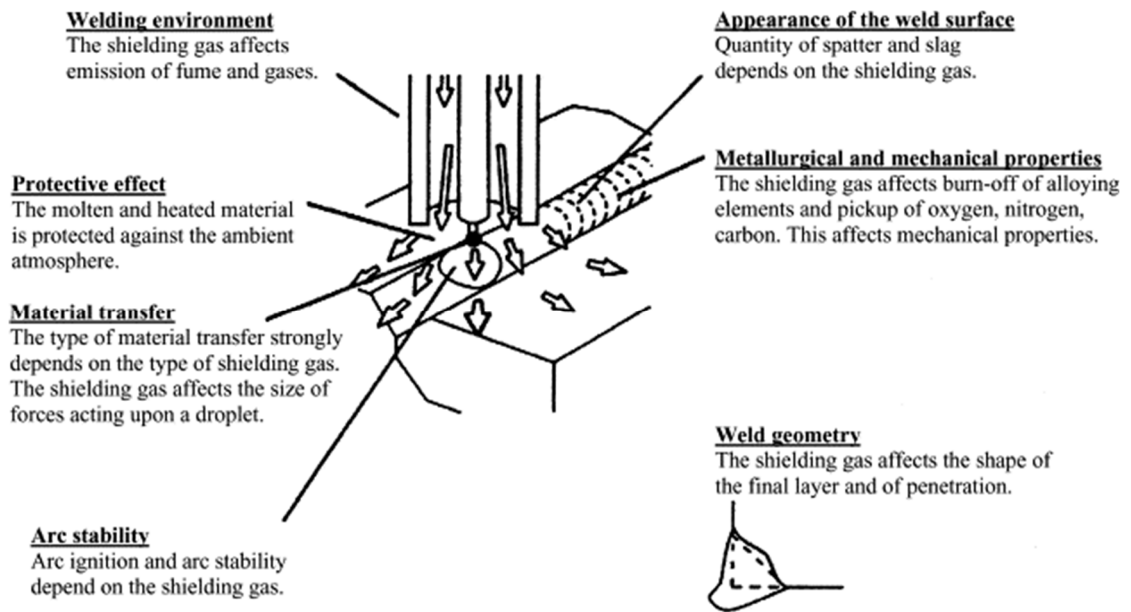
Shielding gas functions in arc welding [5].
